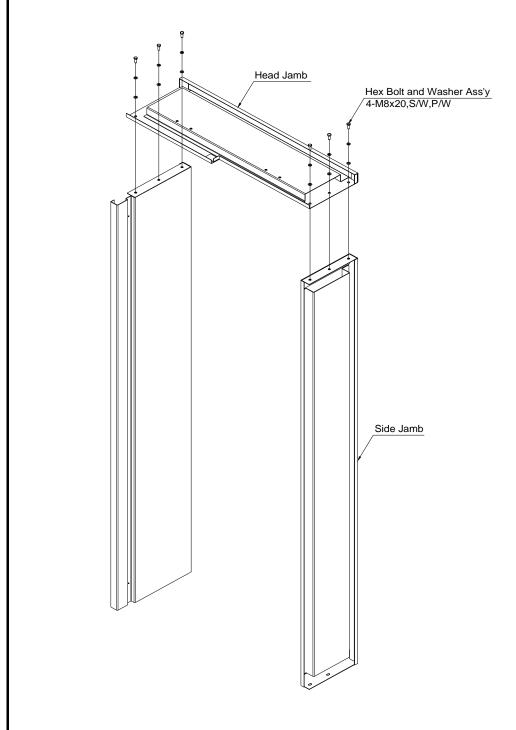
JAMB ASSEMBLY (TWO SPEED)
